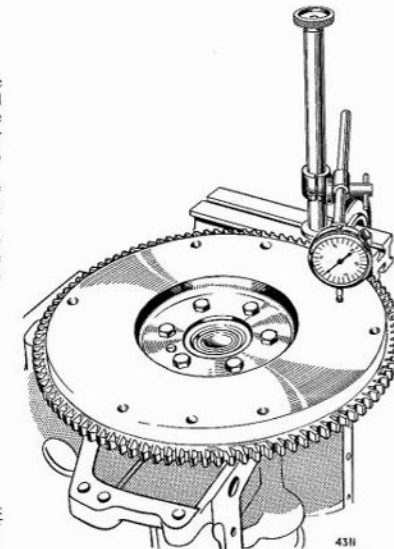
Checking the flywheel for "run-out", using a dial gauge
